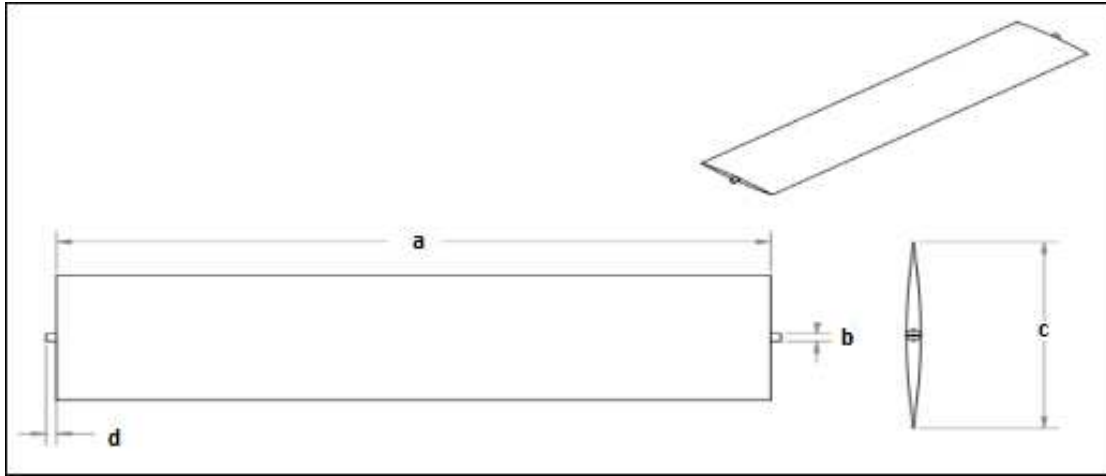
The top, side and isometric views and marked dimensions of a deflectable guide vane.
